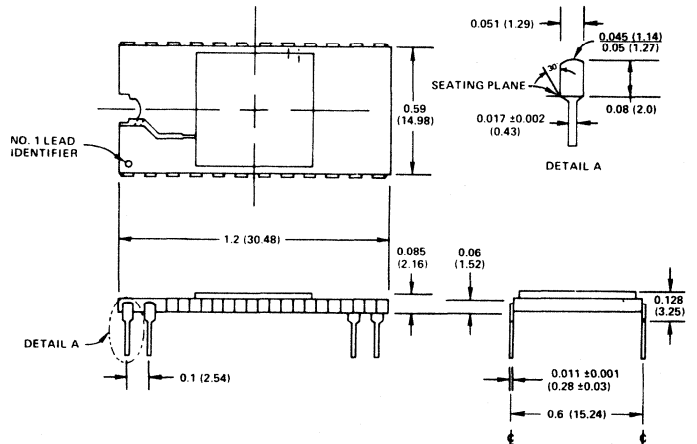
Hermetically-Sealed Ceramic Side-Brazed Package (Type D) 24-Lead Dual-In-Line
